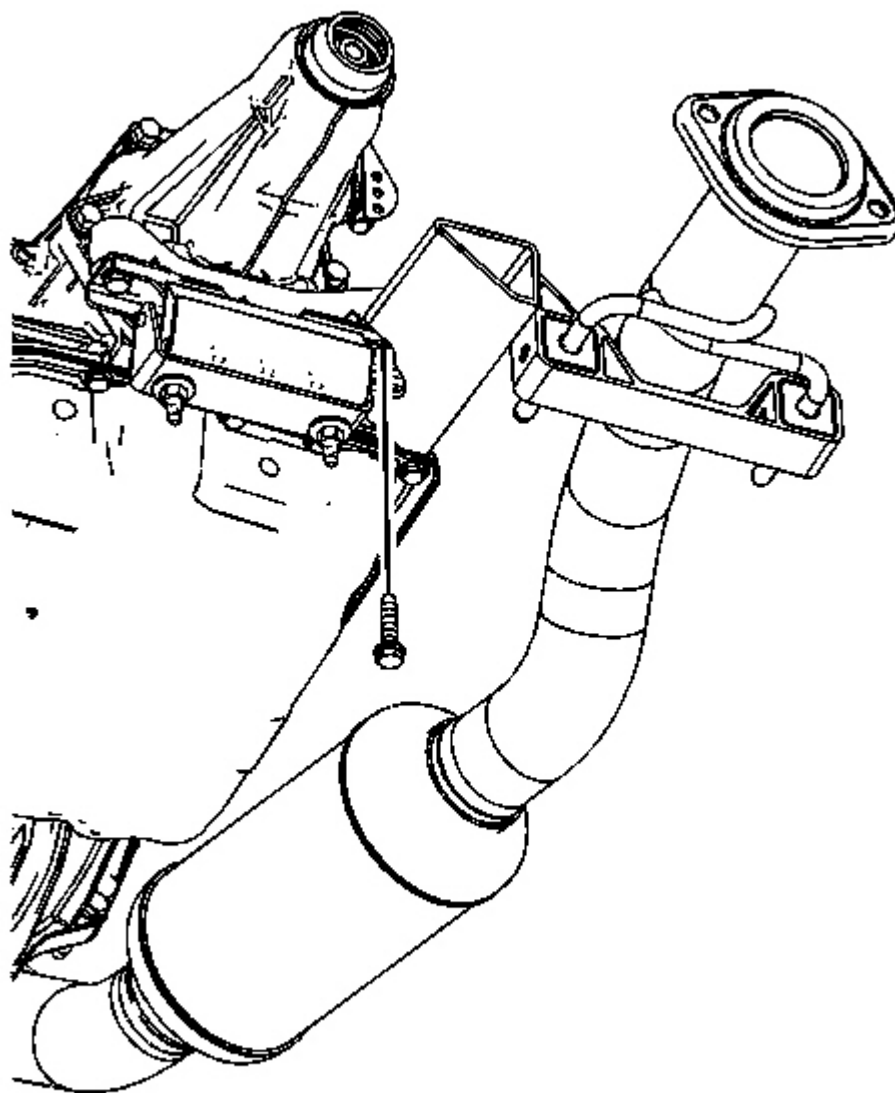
View Of Exhaust Hanger-To-Transmission Mount Bolt
